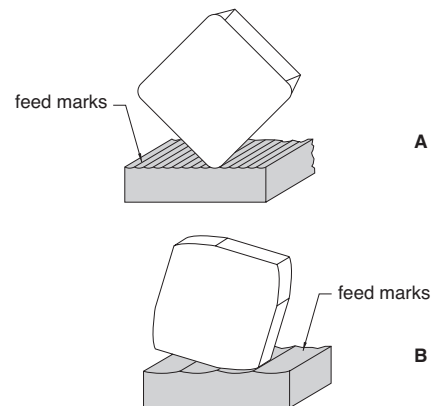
Feed marks produced with a nose radius insert (A) compared to marks produced with a wiper insert (B).
